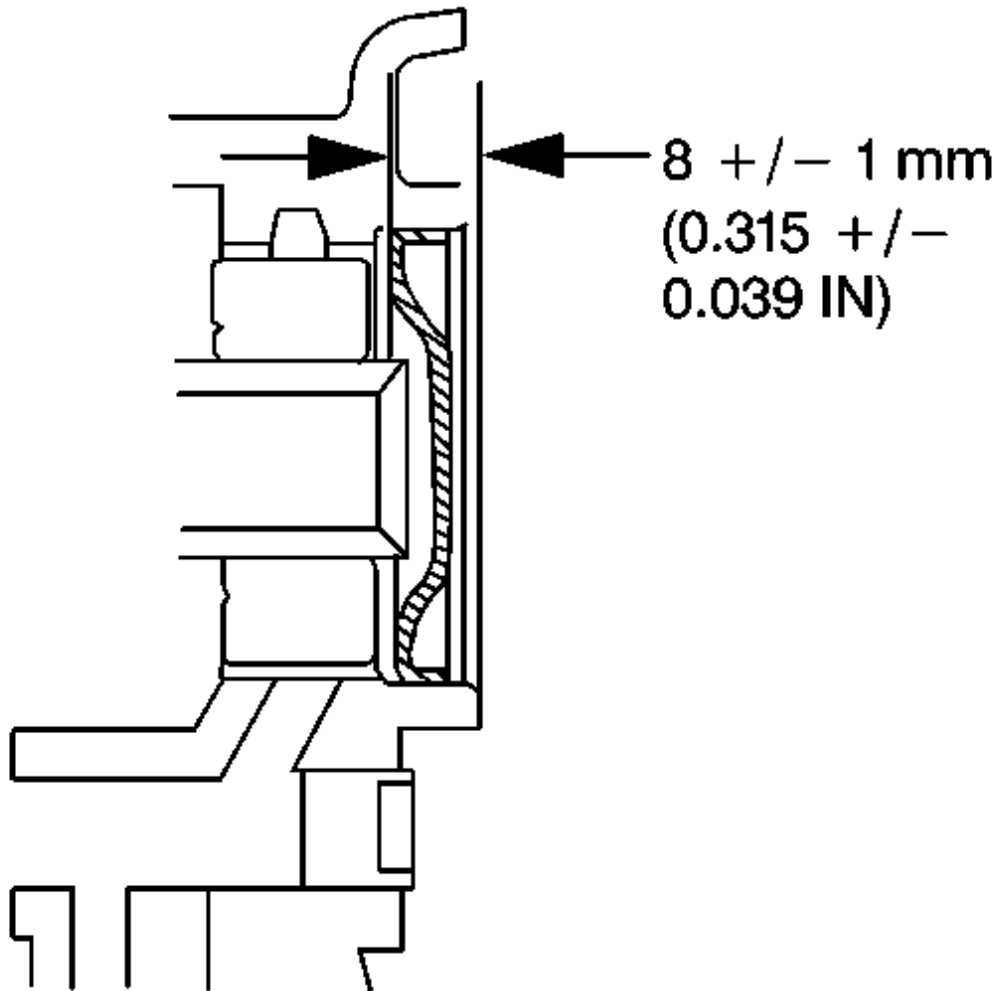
Illustrating Proper Camshaft Rear Bearing Plug Specifications
